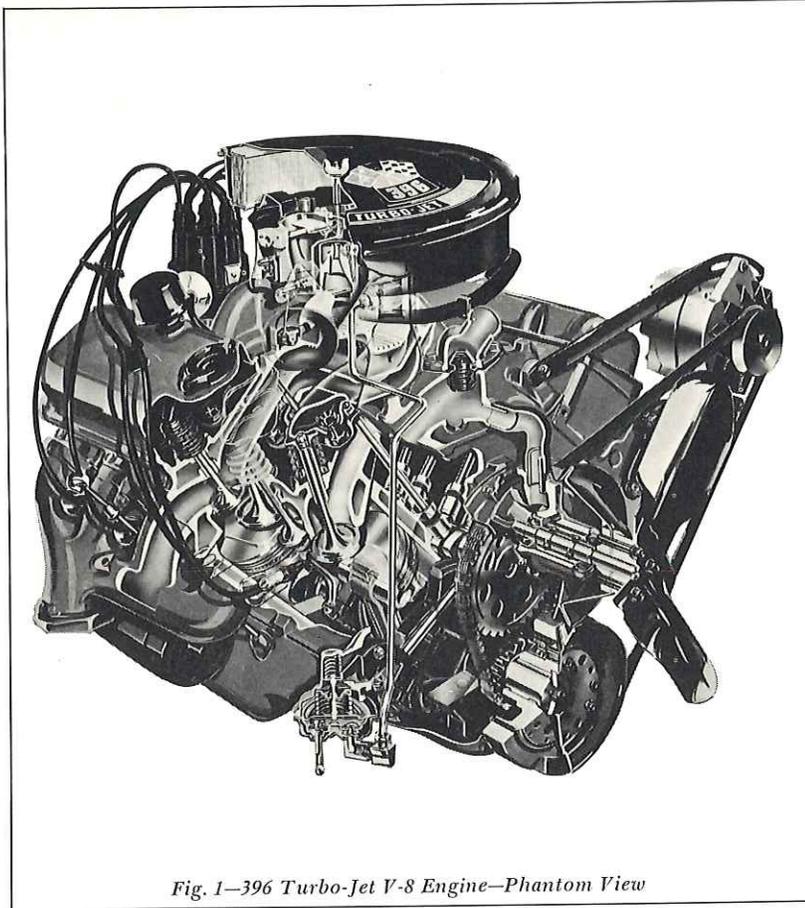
396 Turbo-Jet V-8 Engine—Phantom View
